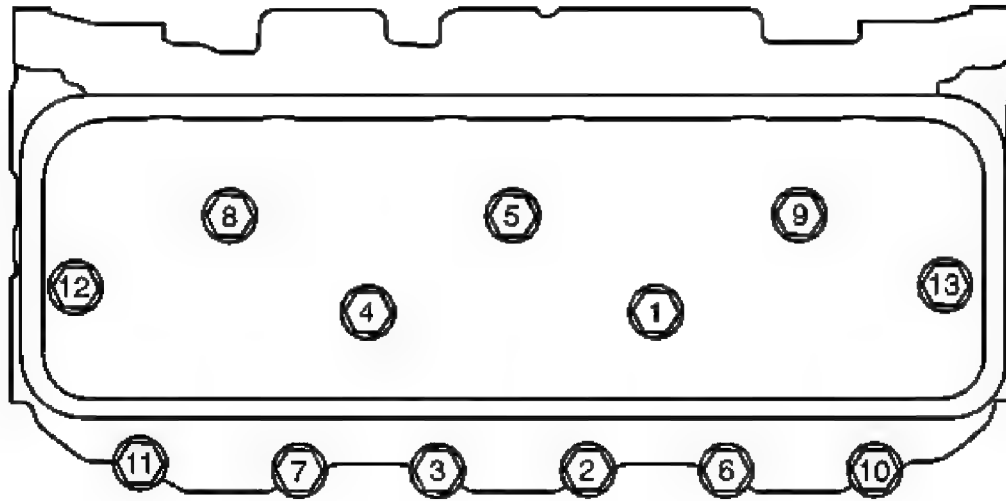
Identifying Cylinder Head Bolt Tightening Sequence
